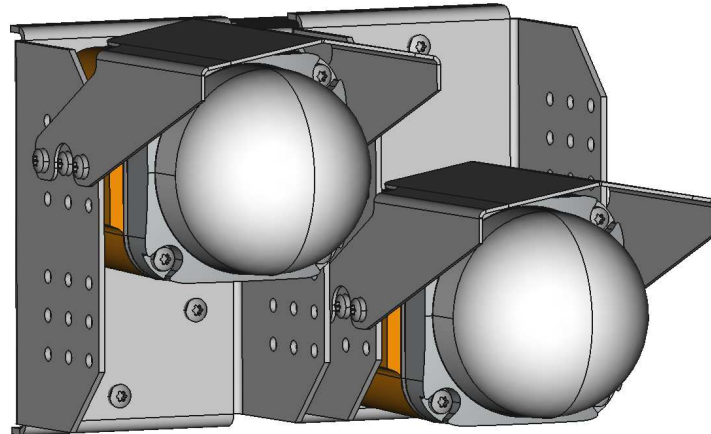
Two LPR[®]-1DHP-200 mounted in the diversity mounting bracket.
